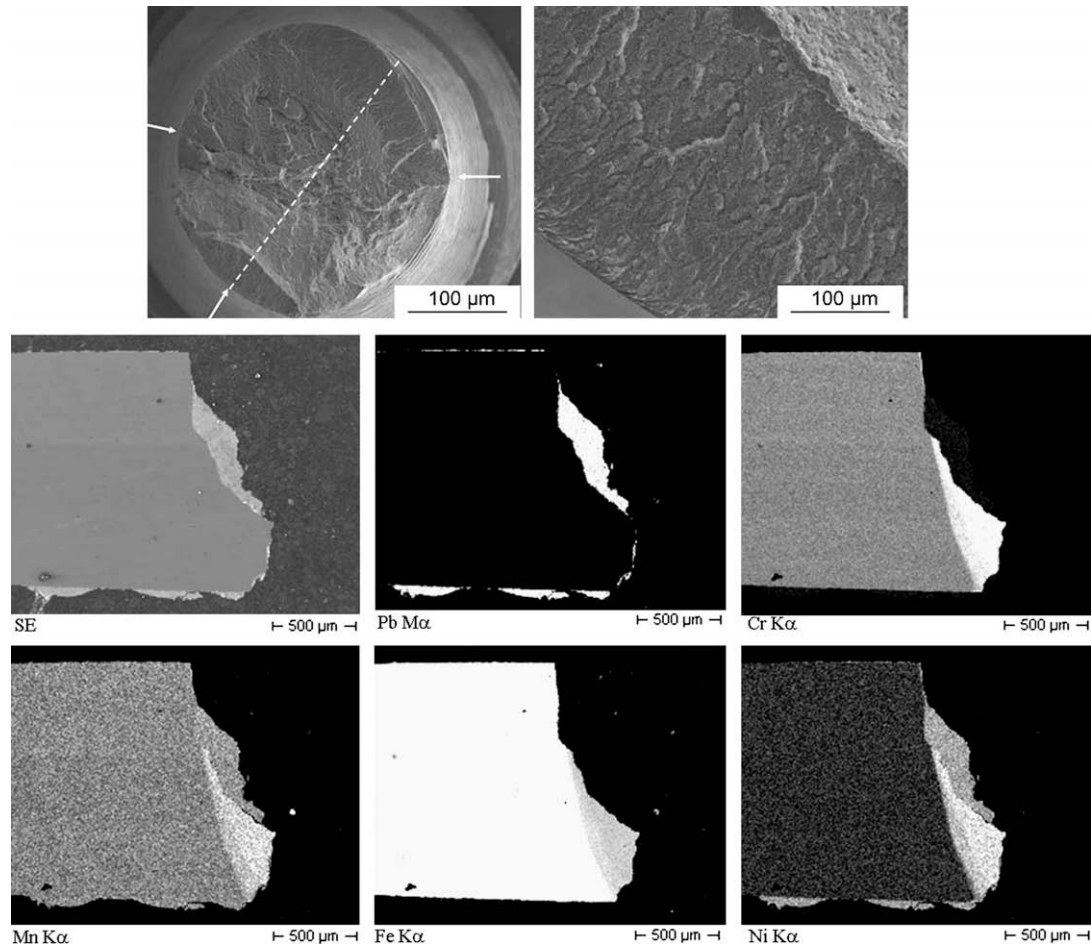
Fracture surface of T91/316L TIG weld tested in LBE (shown on the left in Fig. 4) and chemical mapping of a transverse section of the broken tensile specimen. Arrows indicate the sites of LME. The dashed line in the fracture surface shows where the transverse section was taken from the other half of the broken tensile specimen.
